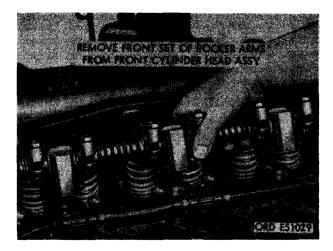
REMOVING OR INSTALLING FRONT ROCKER ARMS.
